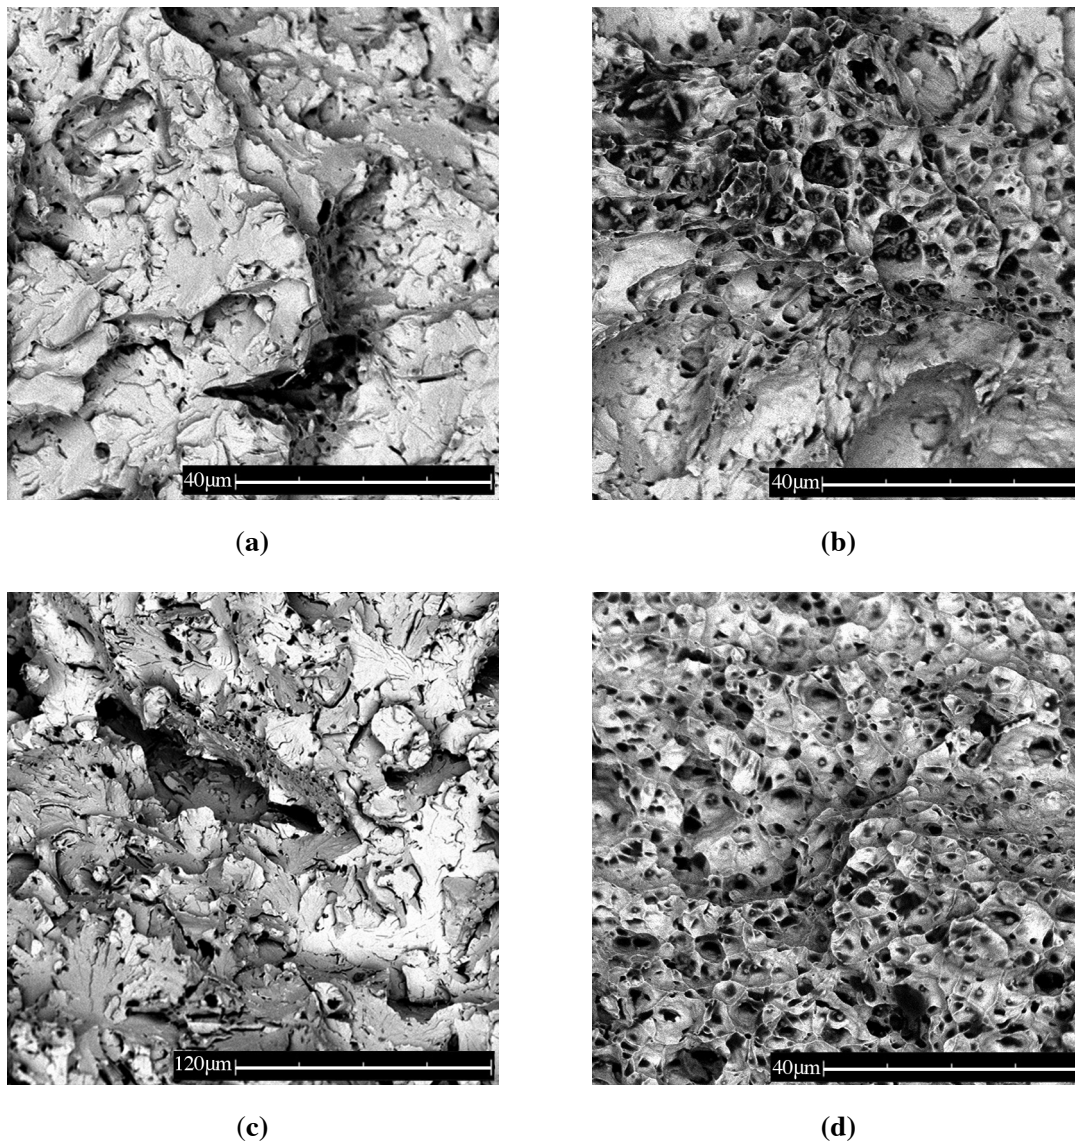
Fractographic images of the weld metal fractures (a), (b) and near-weld area of the heat affected zone (c), (d) of the welded joint obtained by SMAW.
